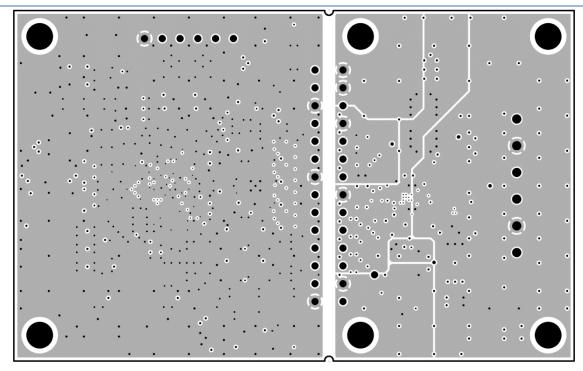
Layout view – Layer 5 - Internal – Ground and Power (not to scale)
